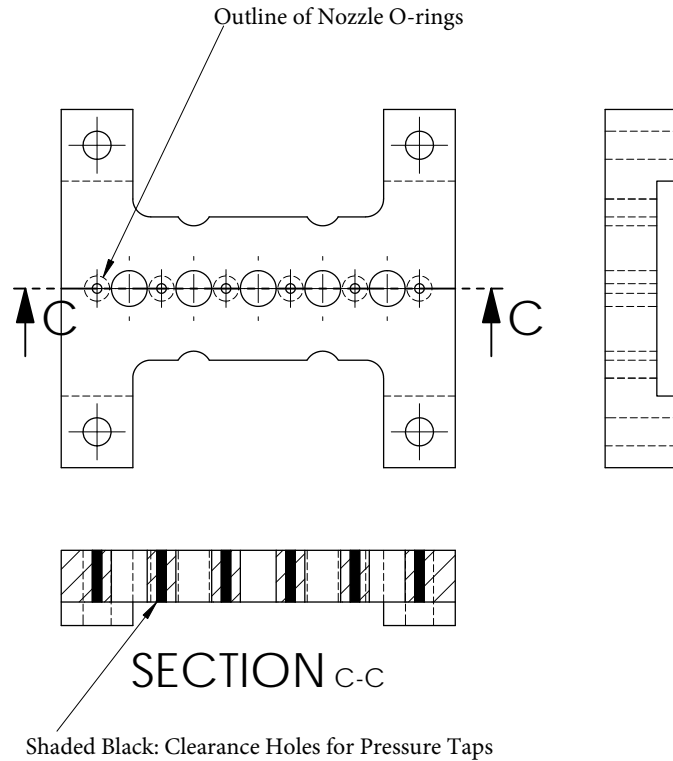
Top view and section of nozzle clamp used to compress the nozzle O-rings.
